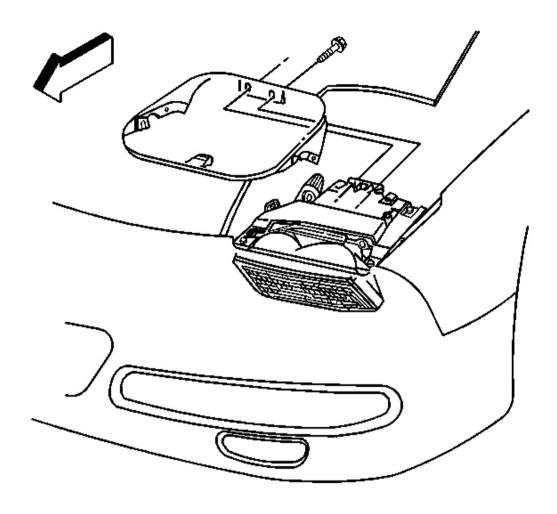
Headlamp Opening Door Rear Retaining Screws Courtesy of GENERAL MOTORS CORP.
